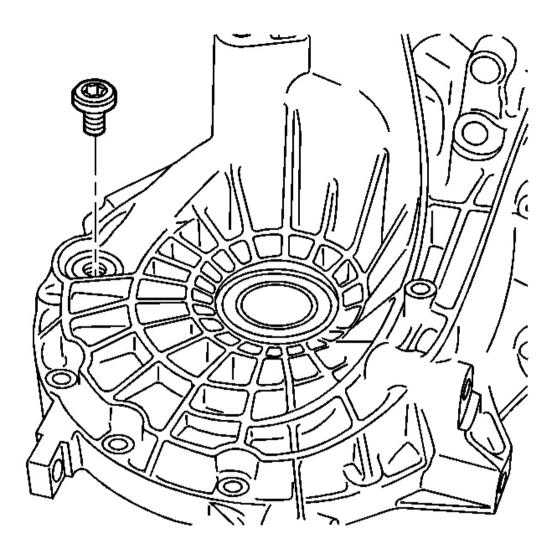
Transmission Drain Plug Courtesy of GENERAL MOTORS CORP.
